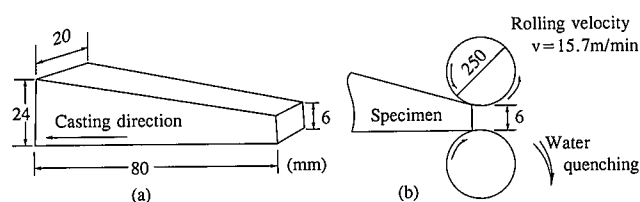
Single-pass rolling test specimen (a) and rolling conditions (b)<sup>4)</sup>
